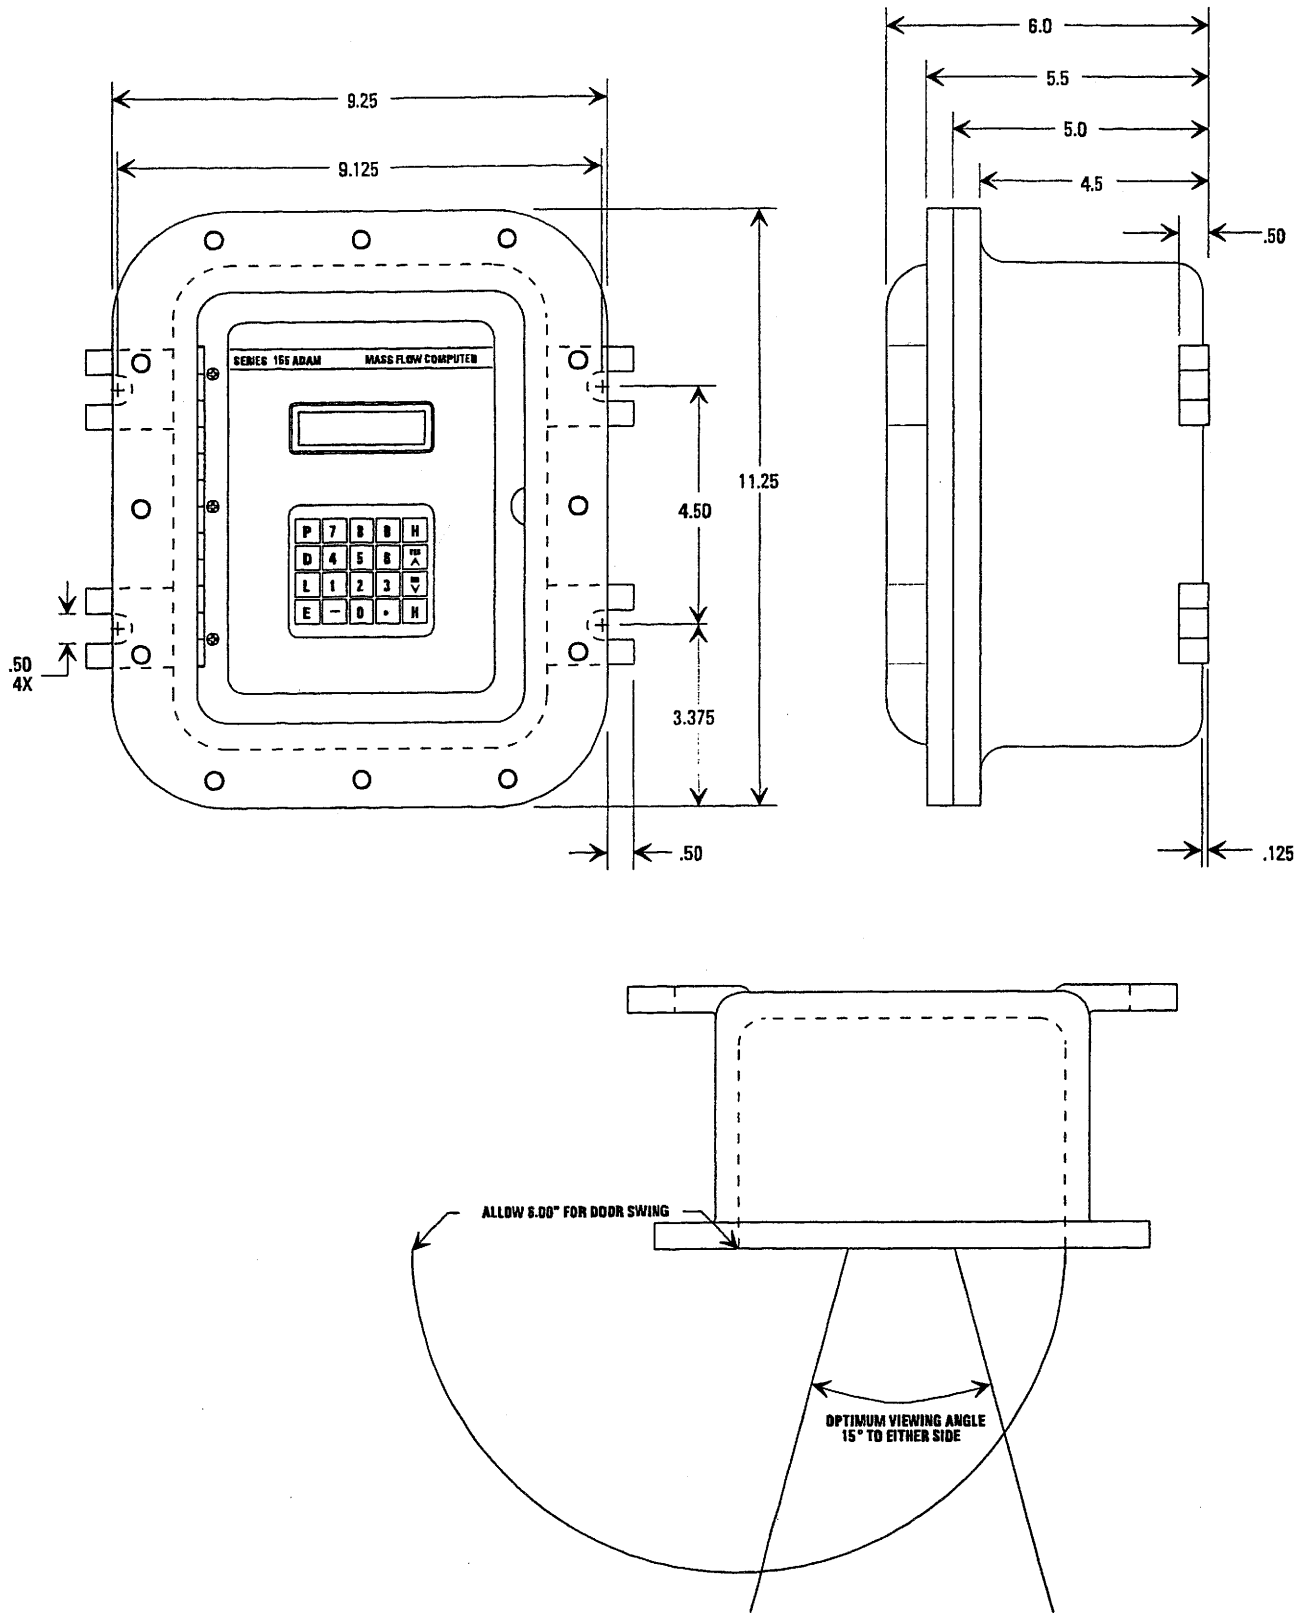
, Installation dimensions, NEMA Type 7 Enclosure
